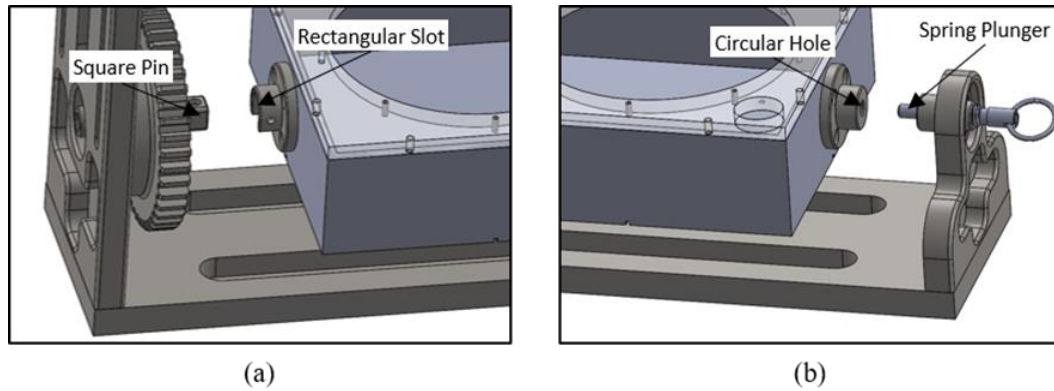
Fixture attachment to the secondary yoke for (a) motor side and (b) yoke
